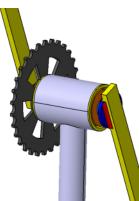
Extra hand crank reverse threaded on to hub assembly
